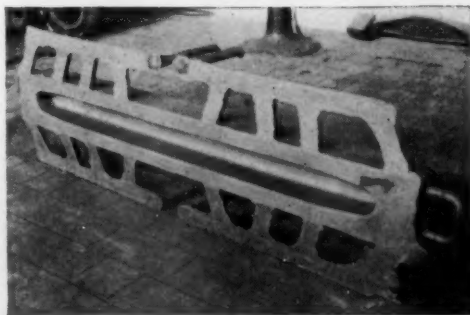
CHROMIUM CAST IRON INGOT MOLD FOR COPPER INGOTS AFTER SHAKE-OUT WEIGHING 220 Kg. (500 Lb.).
